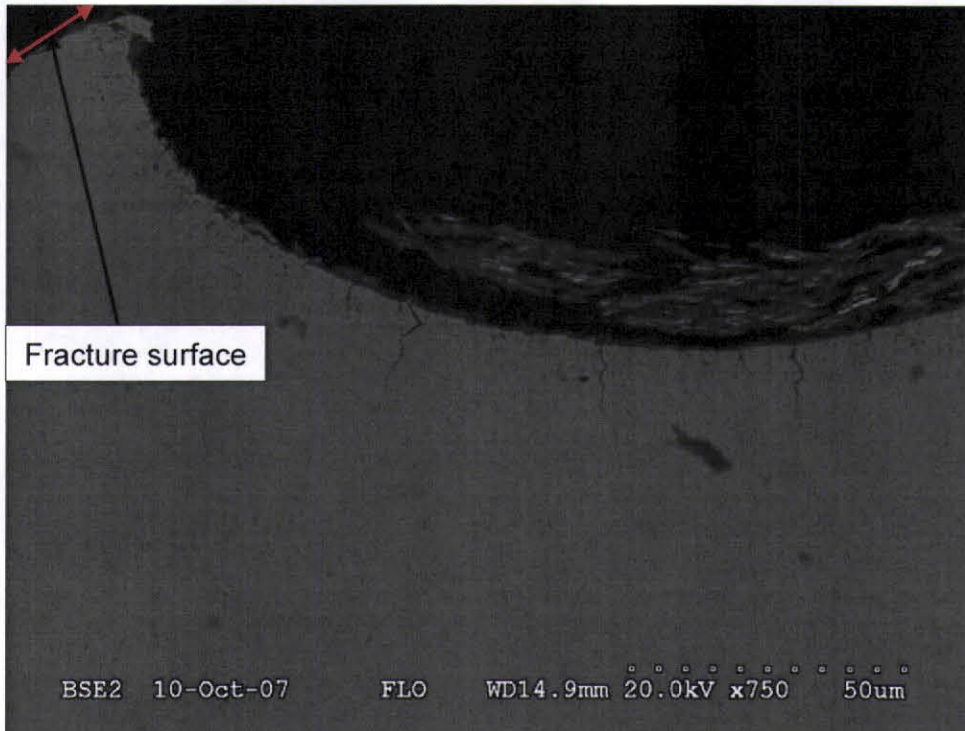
Picture of cross section through thread root close to the bolt fracture. Area also shown in Figure 6.
